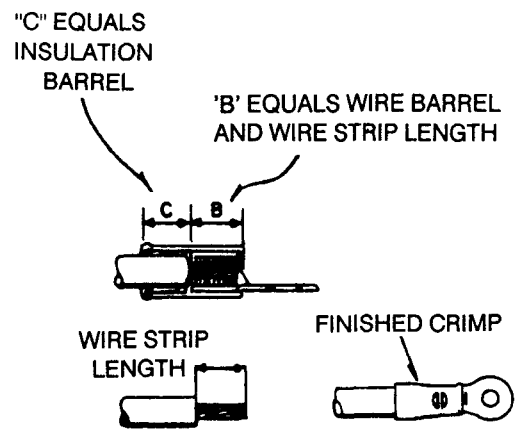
Proper Insertion of Stripping Wire in Insulated Terminal Lug for Crimping.
